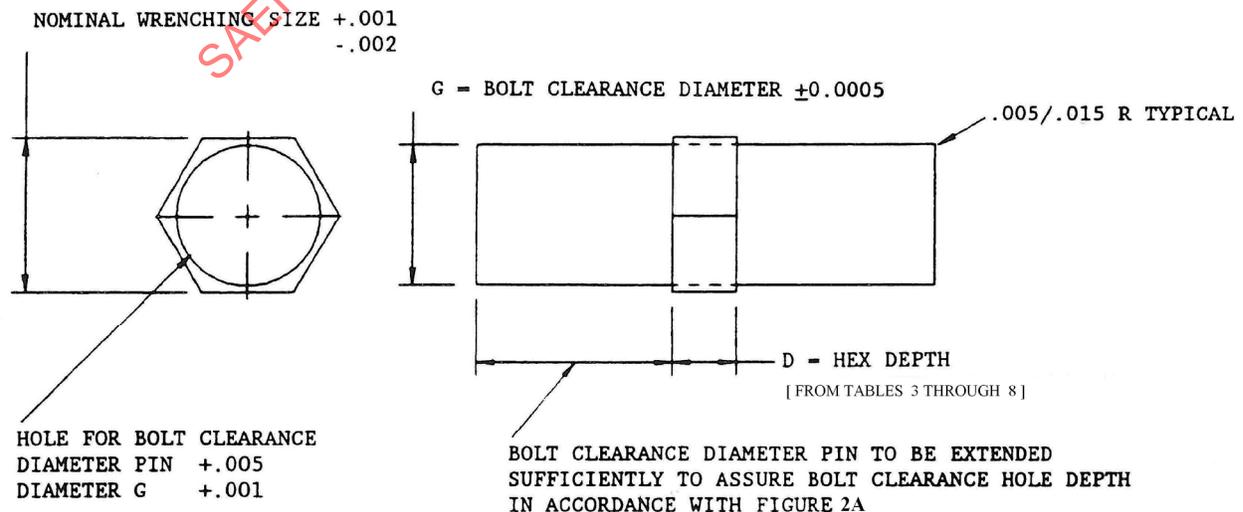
C - BOLT CLEARANCE HOLE GAGE
